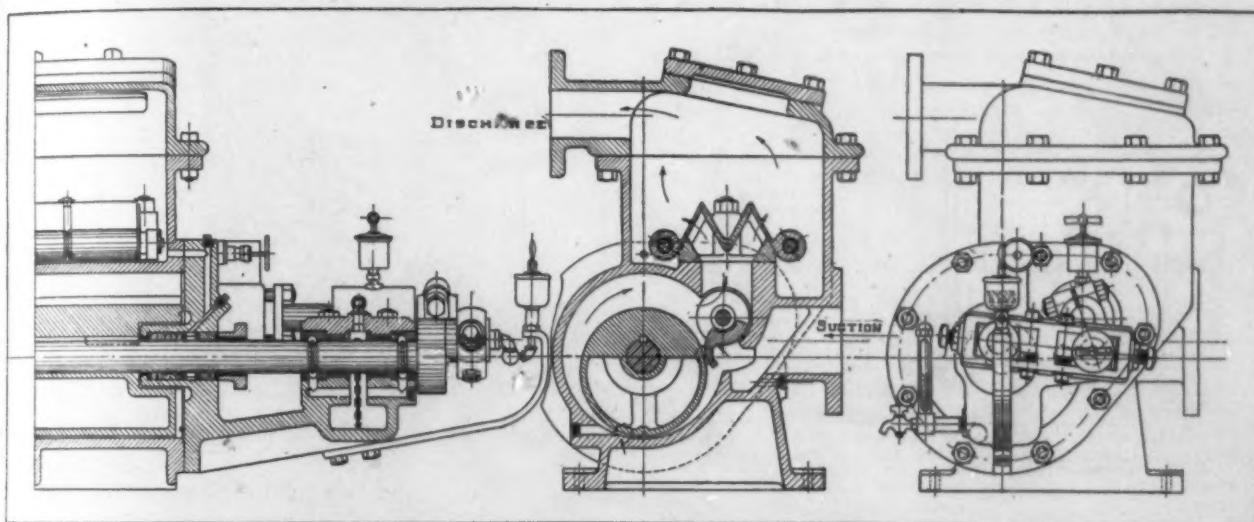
Axial and End Sections and End Elevation of the Rotrex Pump Built by the C. H. Wheeler Mfg. Company, Philadelphia, Pa.
